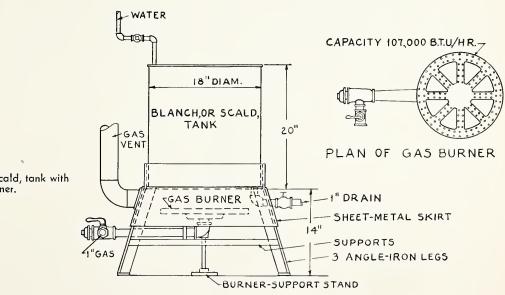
Blanch, or scald, tank with wheel-type burner.
